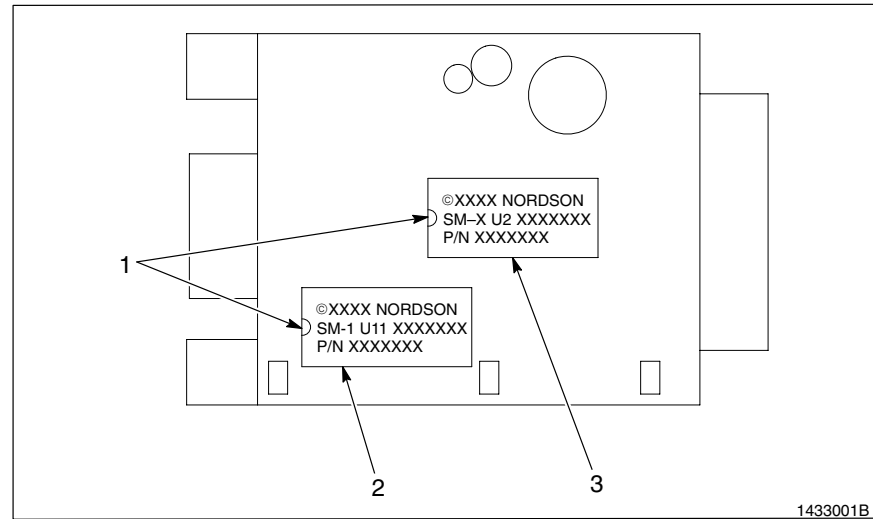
Spray Monitor Circuit Board with Chip Locations
